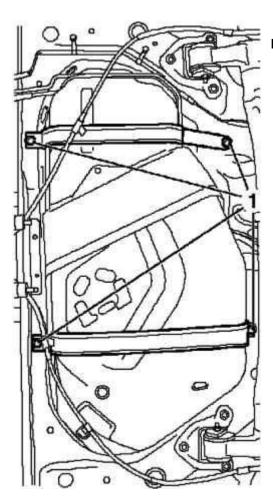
Mounting Fuel Tank: 1 - Bolts
